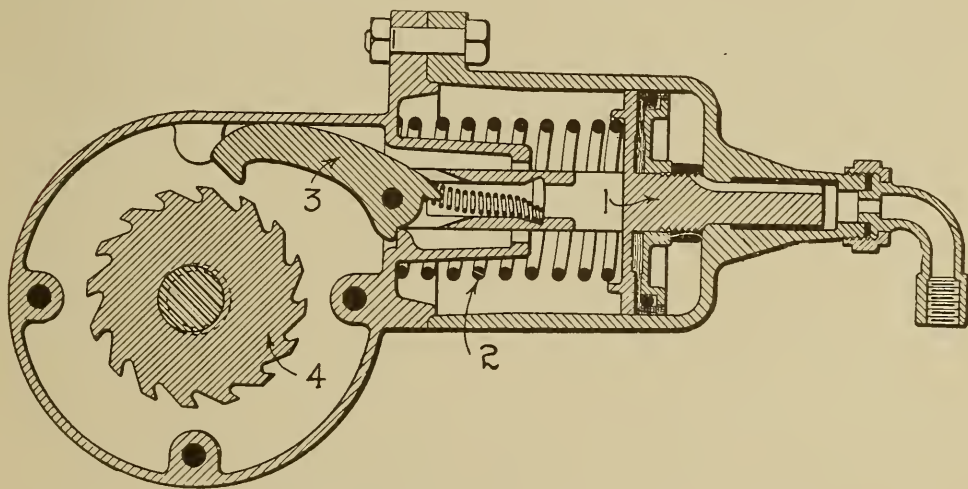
Part Sectional View of Automatic Slack-Adjuster.
